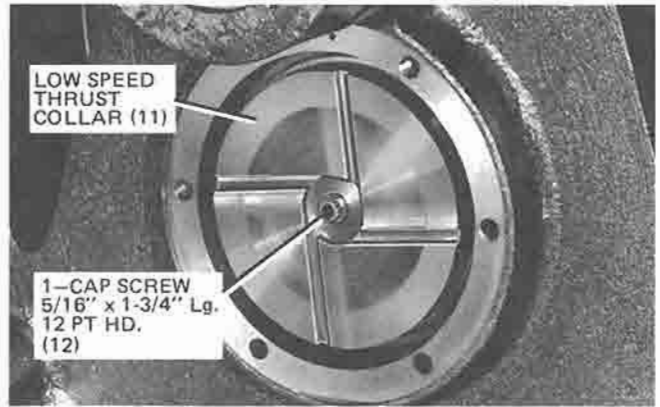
REMOVING FRONT LOW SPEED THRUST COLLAR
